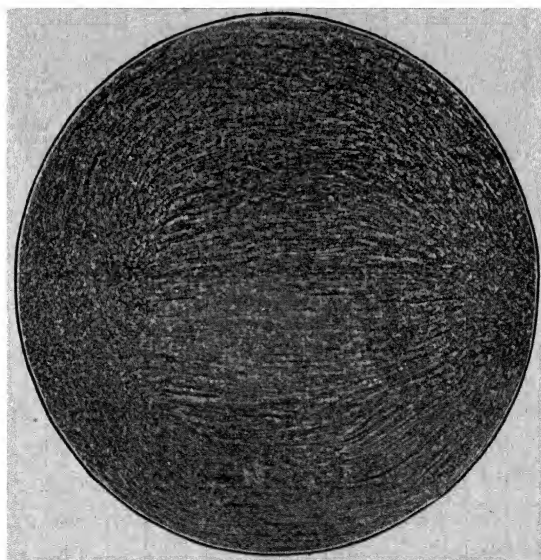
Gear blank forged from flat bar showing parallel fibers.
